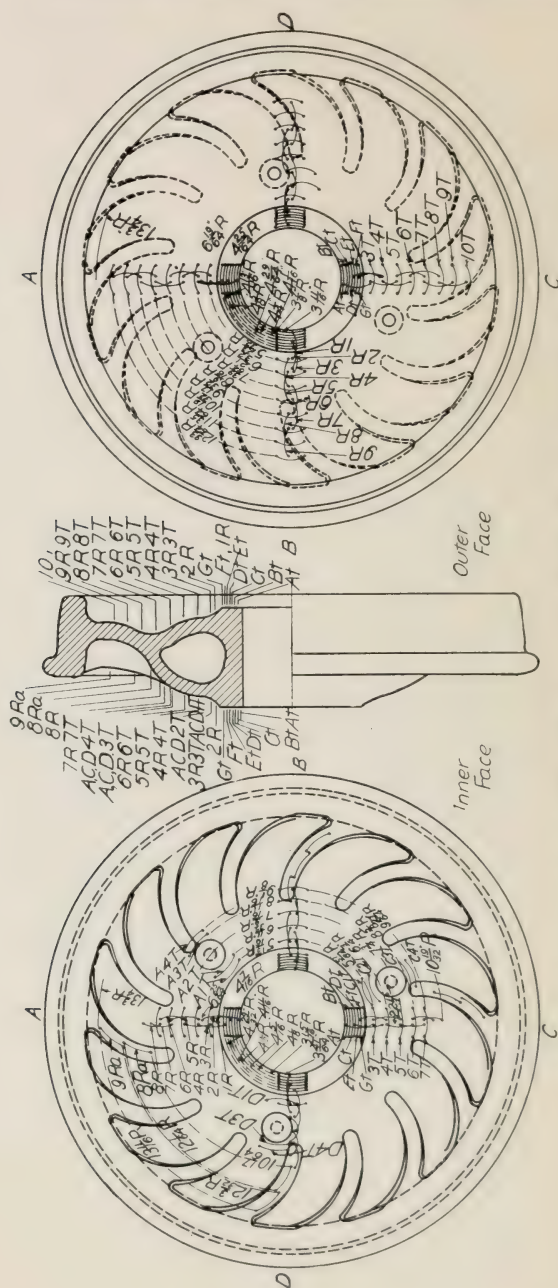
LOCATION OF GAGE-LINES ON 33-IN. 725-LB. M. C. B. WHEEL No. 49 305
